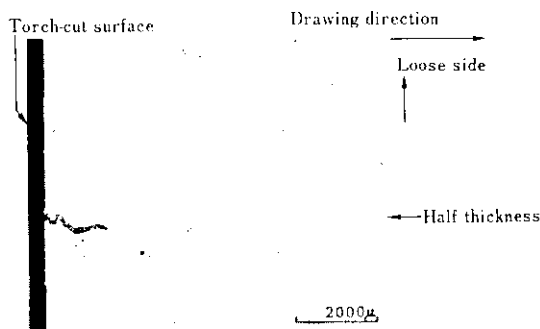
A crack with length of only 1.5mm (longitudinal section of A slab)
